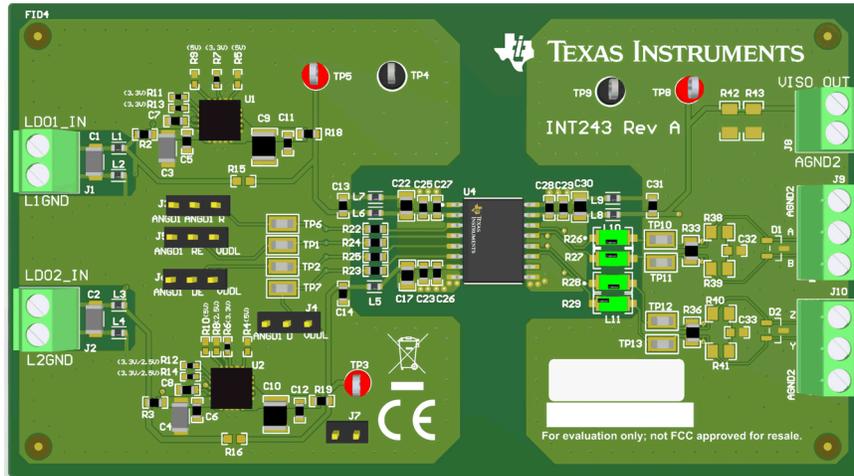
ISOW3080DWEEVM PCB 3D View - Top
